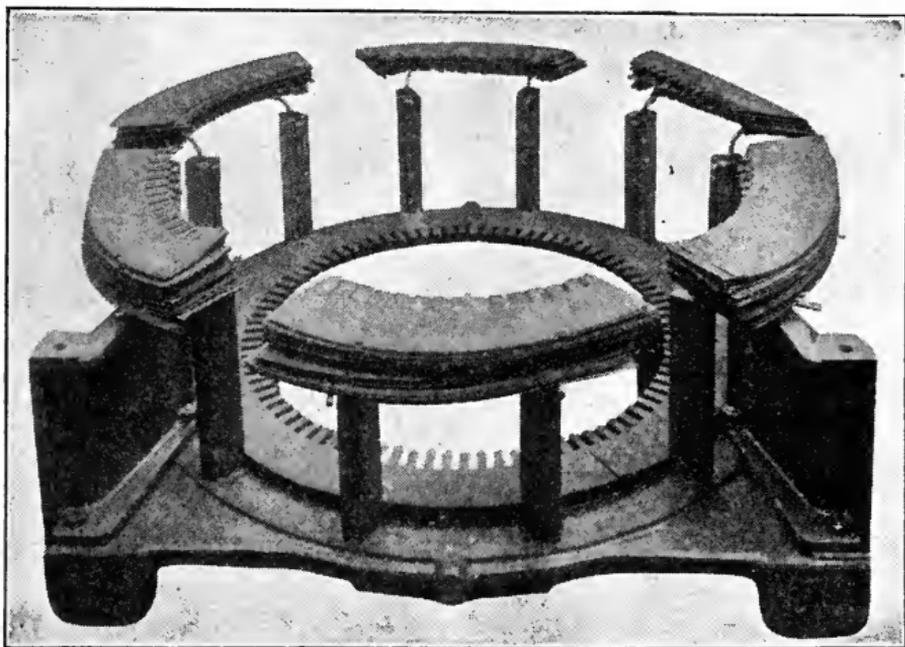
Laminations partly assembled, making up the armature core of a skeleton frame alternator.
